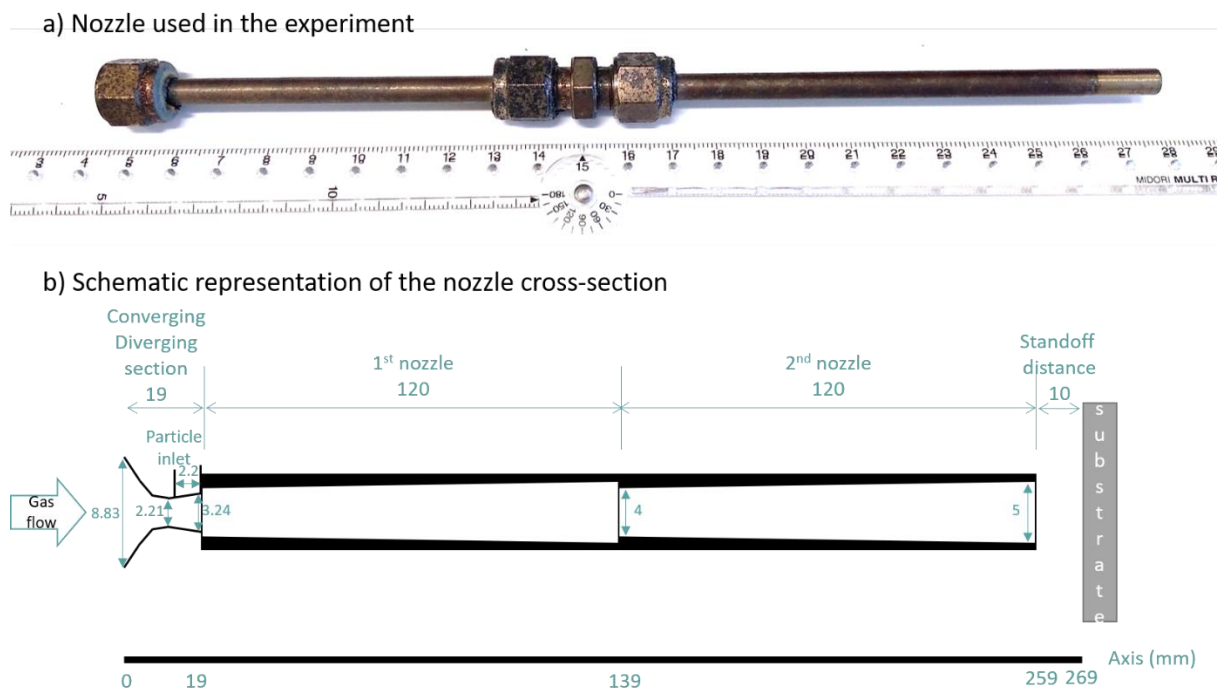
a) Nozzle developed by Ravi et al. (Ref 5) and b) its schematic reproduction of the nozzle cross-section with the particle injection system. The nozzle assembly consists of two 120 mm divergent nozzles attached together. All dimensions are in mm.
